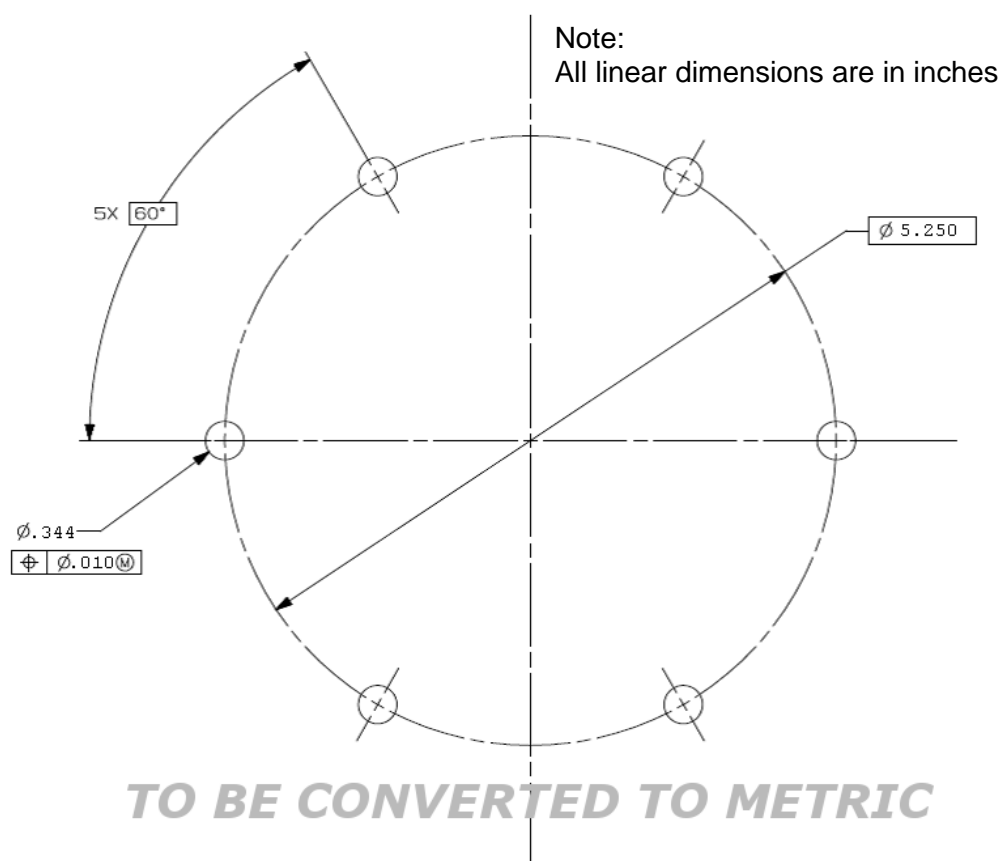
PLATFORM ORU MOUNTING BOLT HOLE PATTERN
